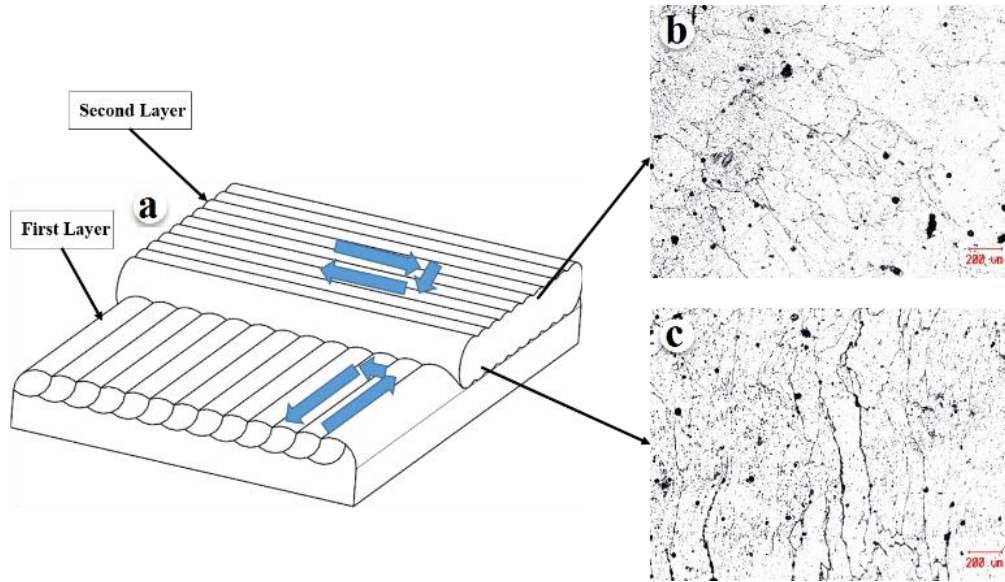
(a) Hatch deposition pattern, (b) Optical micrograph of top of as-deposited 7050, aluminum alloy coupon, and (c) Optical micrograph of bottom of as-deposited 7050 aluminum alloy.
